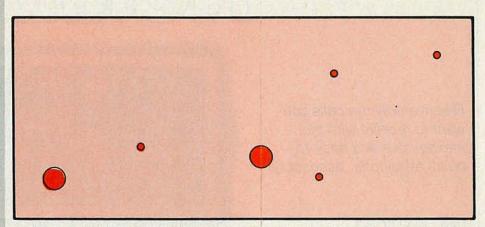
IF YOU USE THE CABINET specified in the Parts List, using this template will simplify drilling the rear panel.
